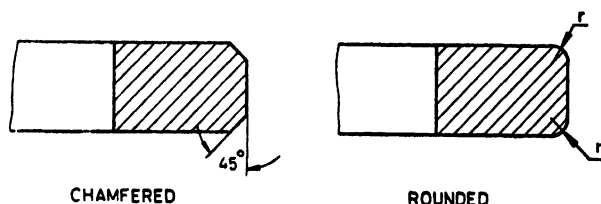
OUTER EDGE DETAILS MEASUREMENT
